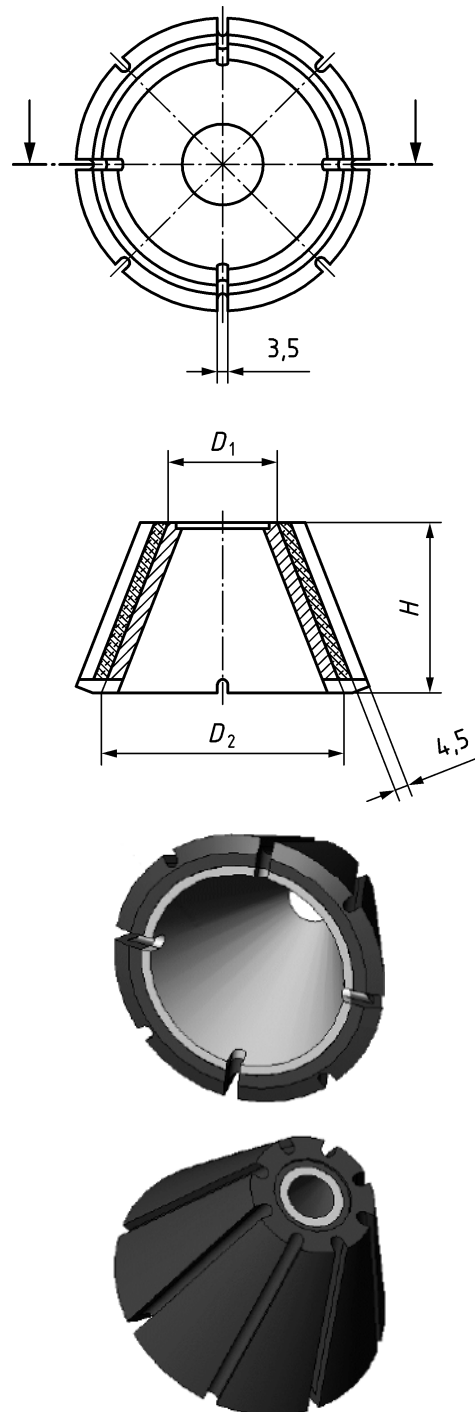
Polishing rollers — 3D view, cross and longitudinal section
